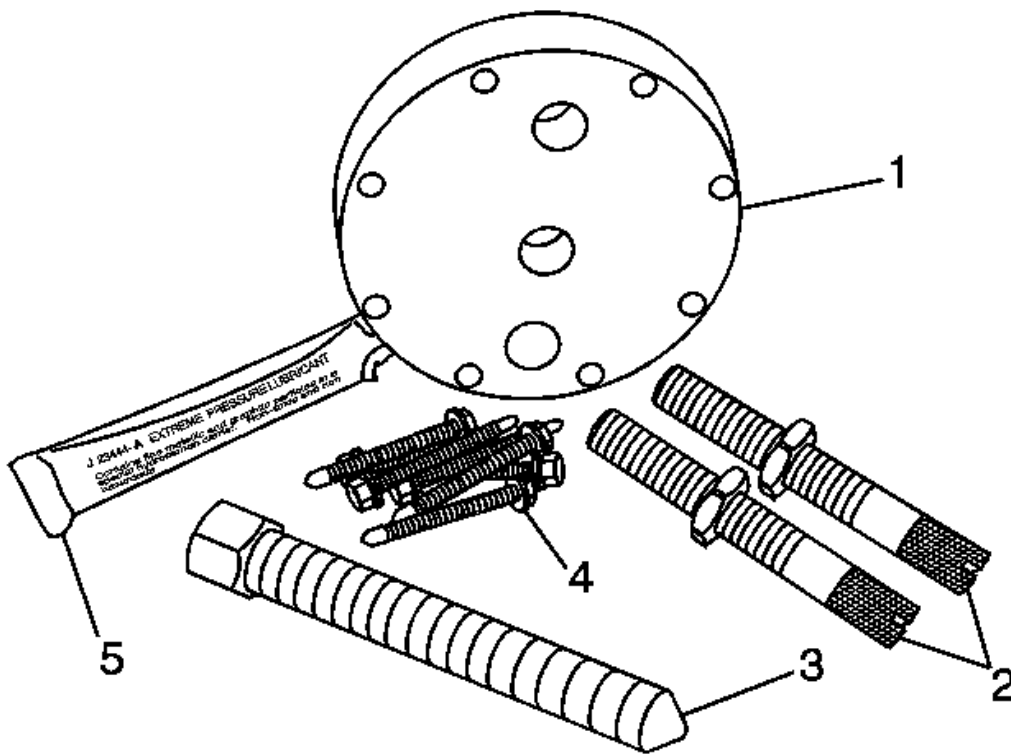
Identifying Rear Main Oil Seal Remover (EN-48672)
